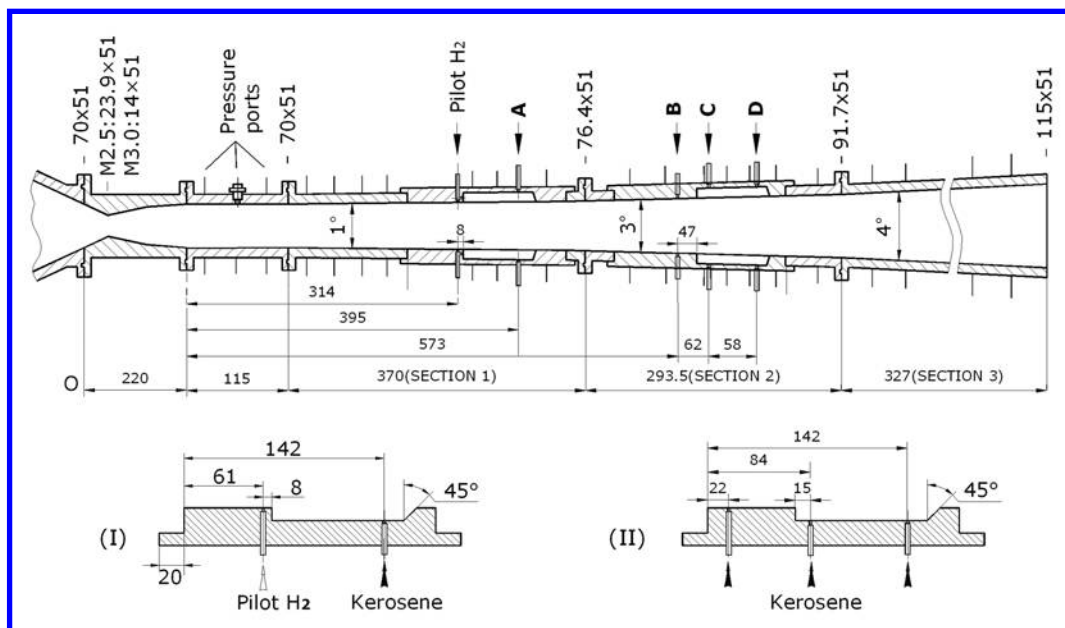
Schematic of Mach 2.5 and 3.0 model combustors (top) and integrated fuel injection and flameholder module (bottom). All dimensions are in mm.
